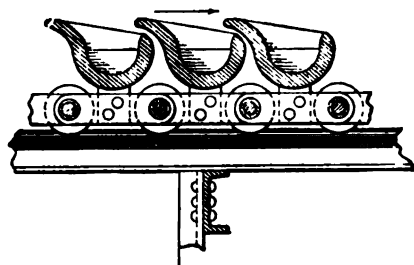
Section through the moulds of the Uehling pig-iron casting machine.
